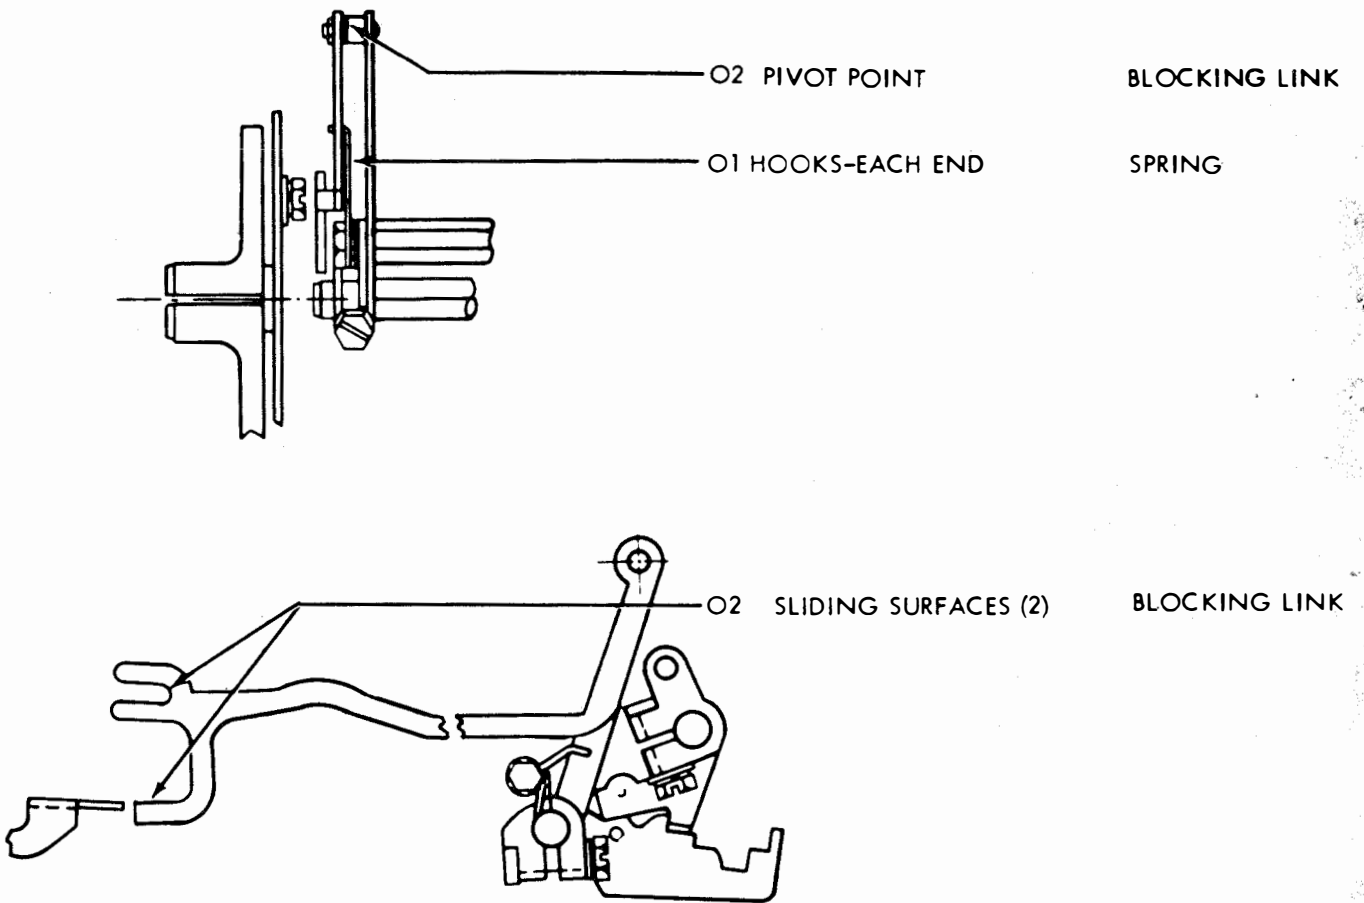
Blocking Link on Remote Control Non-Interfering BLANK Tape Feed-Out Mechanisms
